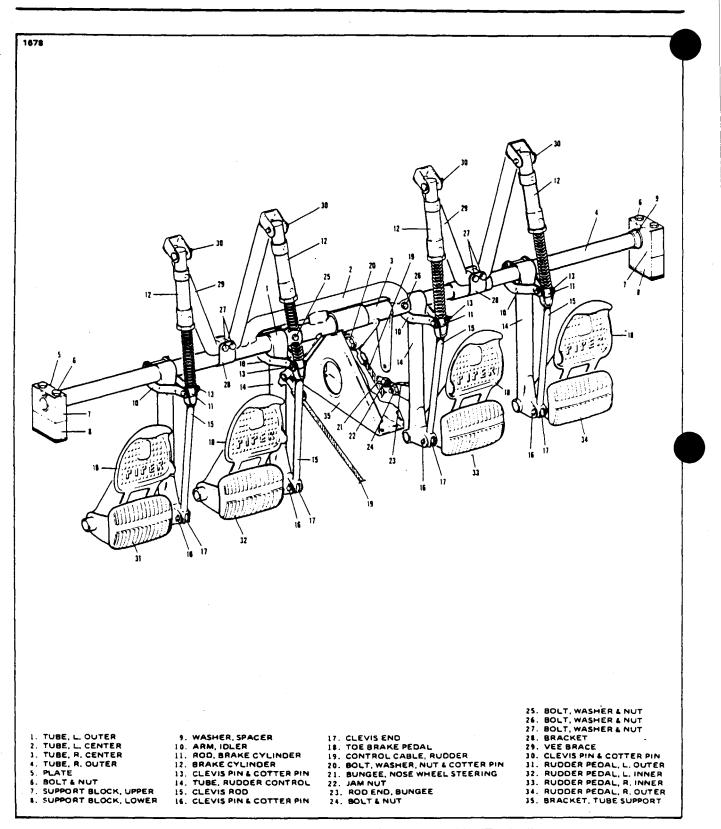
Rudder and Steering Pedal Assembly (Typical)
